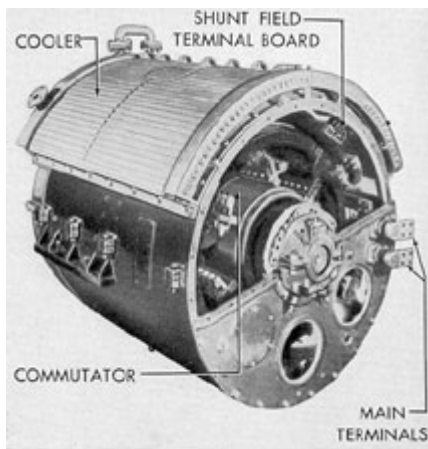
Commutator end view of Allis-Chalmers auxiliary generator, end cover removed.
